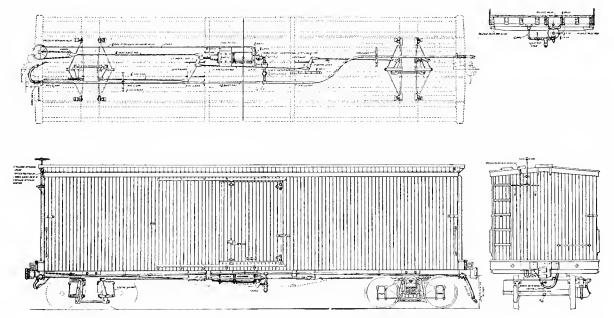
Westinghouse Air Brake Applied to a Freight Car.
